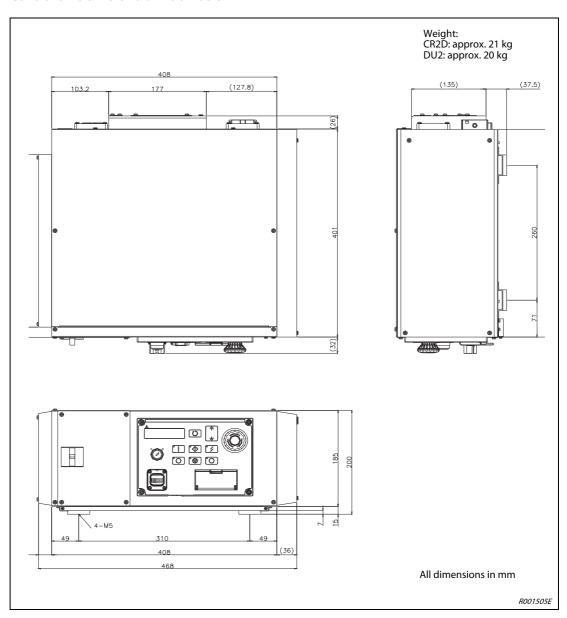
Dimensions of control unit CR2 and drive unit DU2
